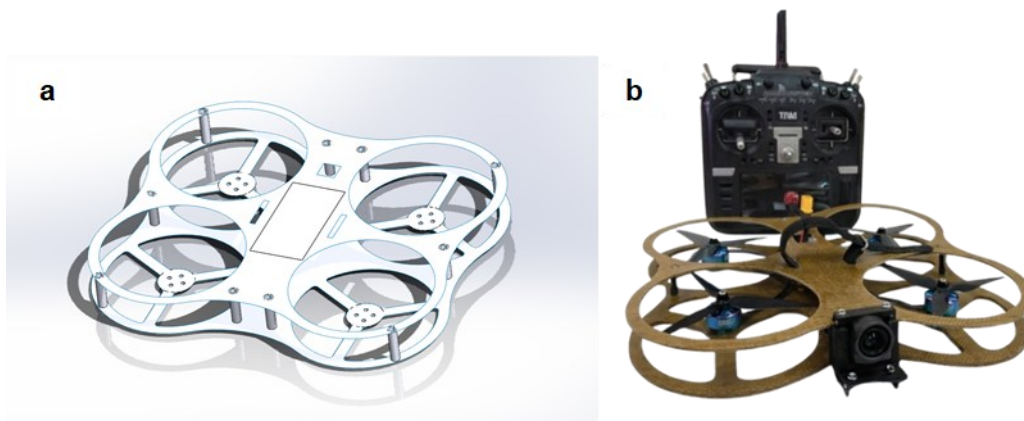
(a) Drone configuration in CAD; (b) Working prototype with KKKK configuration
